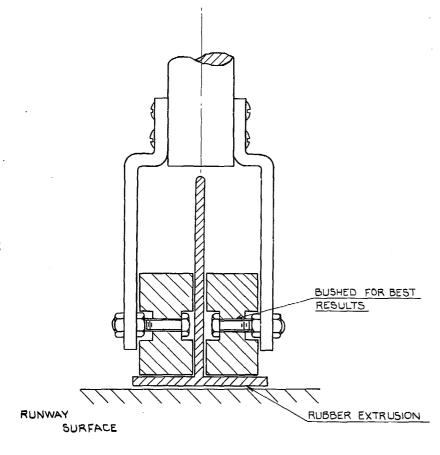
Twin roller for applying pressure when sticking down pond walls.
